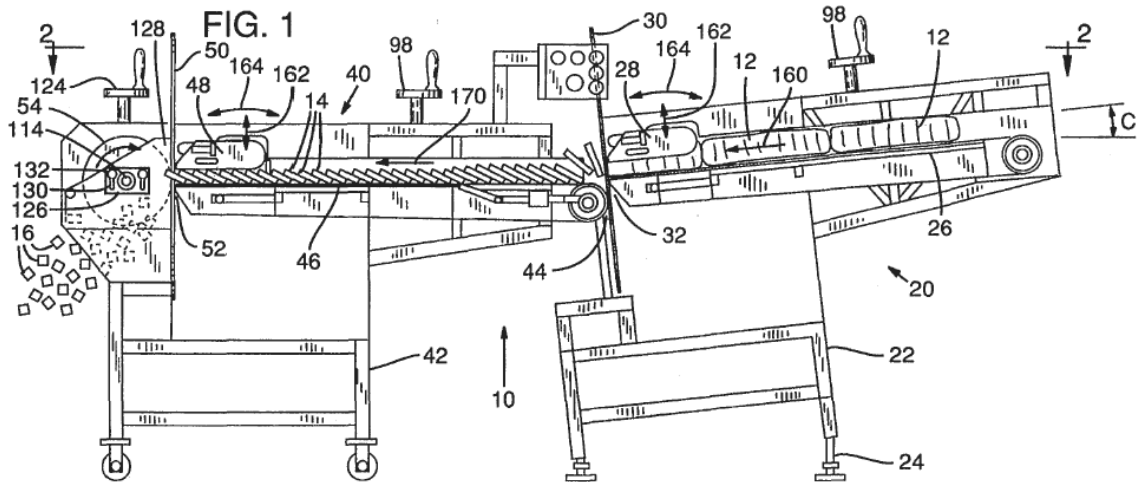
above shows a front view of Wygal's slicing machine. Ex. 1010, 2:57–58. Machine 10 slices loaf 12 into cubes 16 “in a single continuous operation.” *Id.* at 3:6–8. Machine 12 includes two lower conveyors 26, 46 in which one belongs to first slicing station 20 and the other belongs to second slicing station 40 for producing multiple slices or slabs 14 and multiple cubes 16, respectively. *Id.* at 3:23–24, 3:33–39. Slicing station 20 also has rotating cutoff knife 30 whereas slicing station 40 has rotating cutoff knife 40. *Id.* at 3:57–59, 6:1–2. Slicing station 20 further includes “floating upper belt type conveyor 28 that is positioned above and strategic to” lower conveyor 26 to accommodate the height of loaf 12 and have “an improved biasing arrangement.” *Id.* at 3:40–56. Lower conveyor 26 and upper conveyor 28 are driven by controlling motor 60 and knife 30 is driven by variable speed motor 64. *Id.* at 4:10–13, 4:25–27; Fig. 3.
